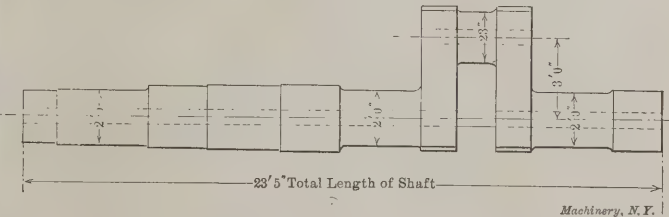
Crankshaft of Large Blooming Mill Engine.
